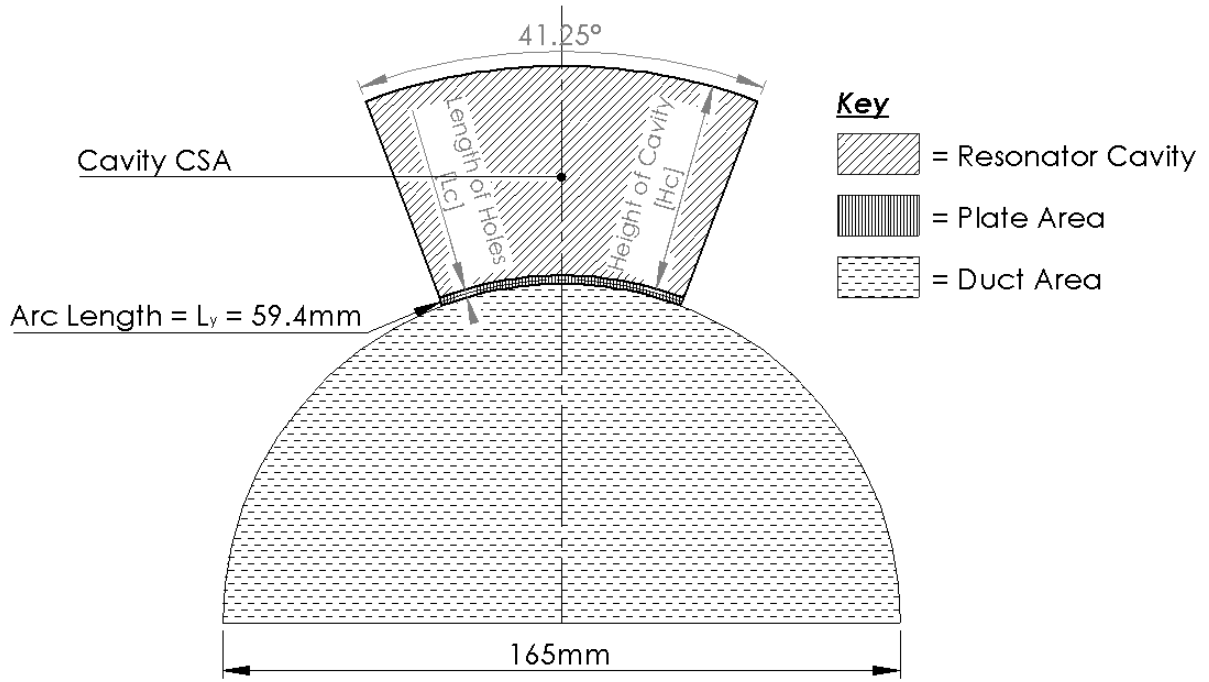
Schematic drawing of measurement rig and resonator cross section
